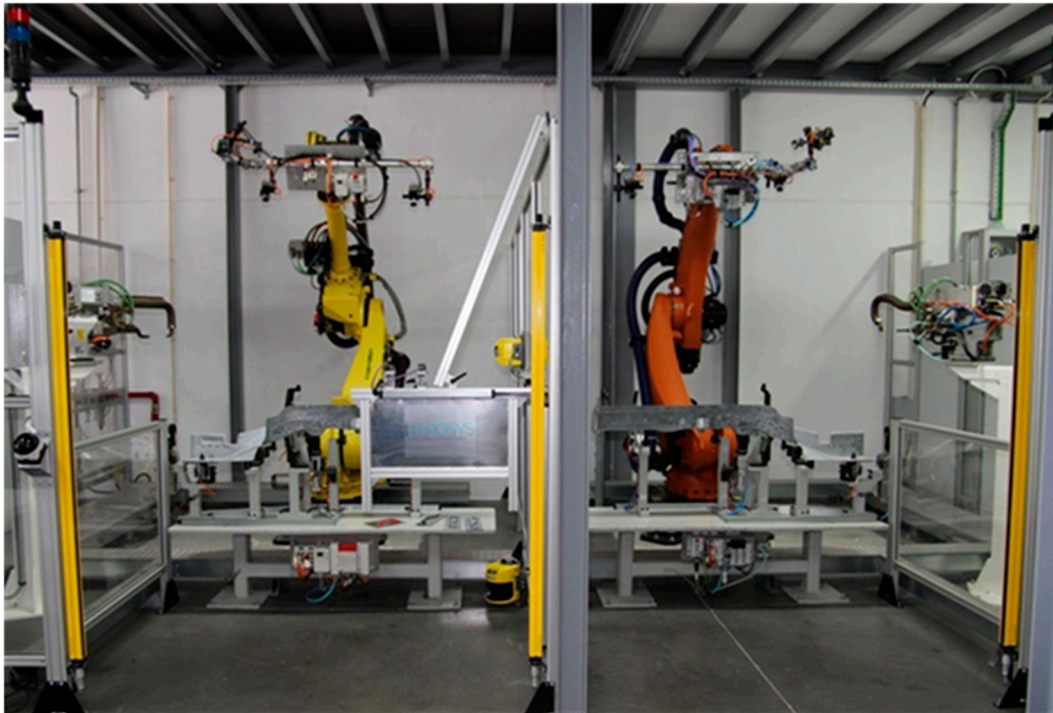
Introsys Welding Industrial Robotic Cells.
